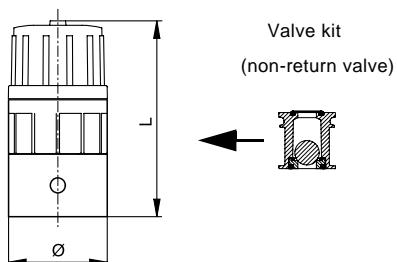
Foot valve and valve kit, DN 4 and DN 8
